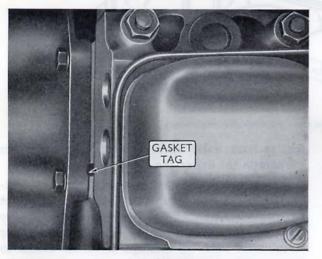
Correct location of the identification tag at the rear end of the cylinder head gasket
